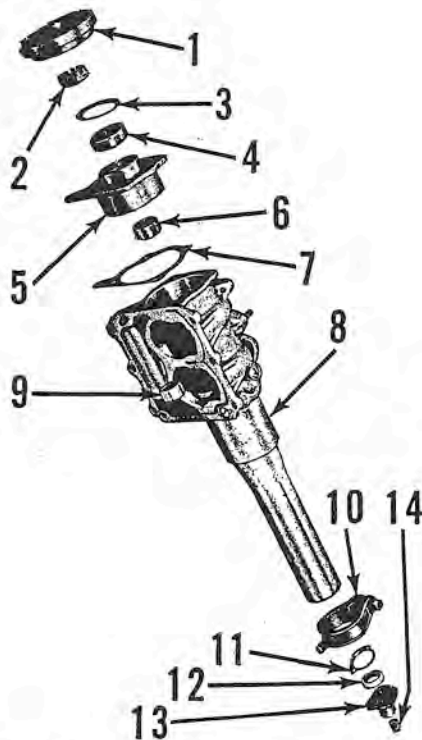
Exploded view of the one-piece crankcase and associated parts.
